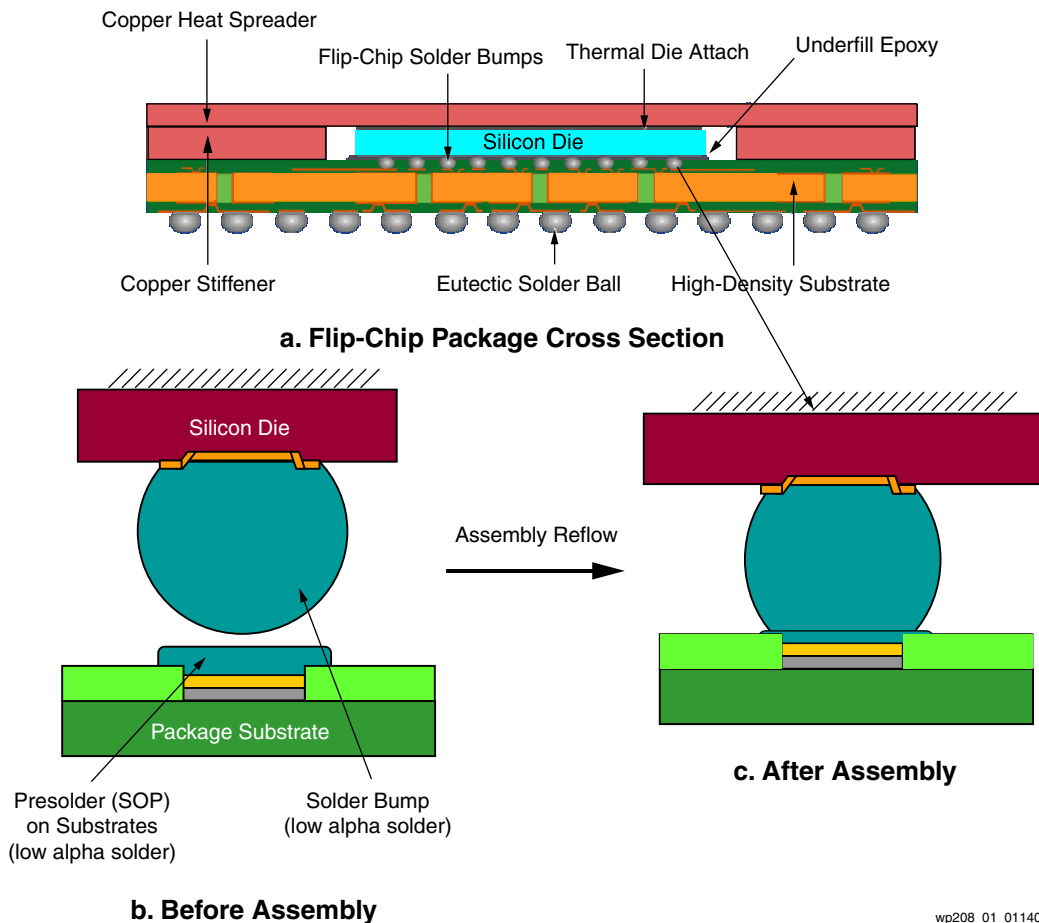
Solder Bump Interconnection within Flip-Chip Packages
